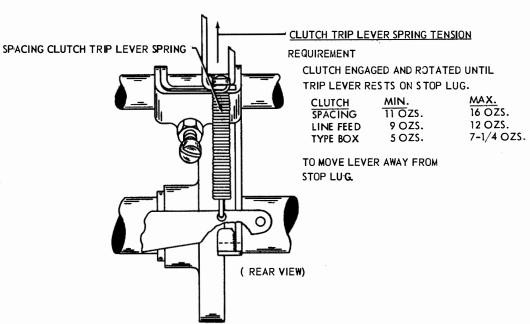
TYPING UNIT, SPACING CLUTCH MECHANISM
